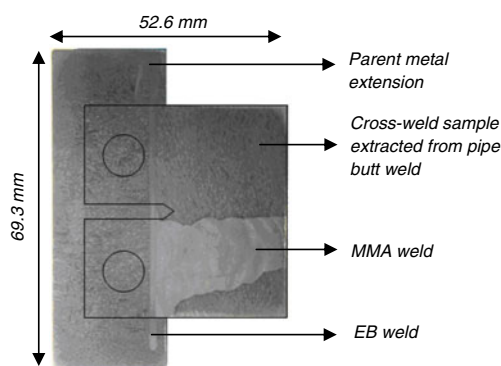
Photograph of electron beam EB welded coupon (21.3 mm thick) prior to extracting a CT specimen blank (CT specimen outline marked showing proximity of the slot tip to the MMA weld)
